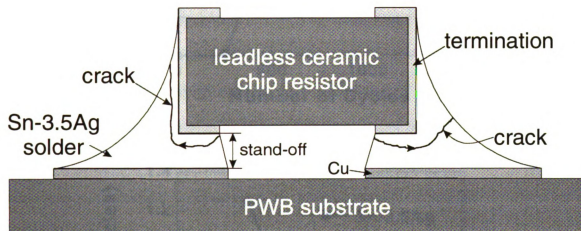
Geometry of the surface mount leadless Sn-3.5Ag solder joint and the crack propagation through the solder joint [79].
